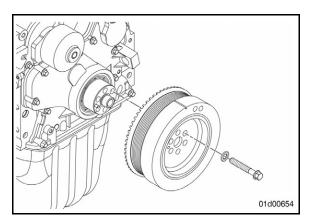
REMOVE THE DAMPER AND CRANKSHAFT SPEED INDICATOR RING
